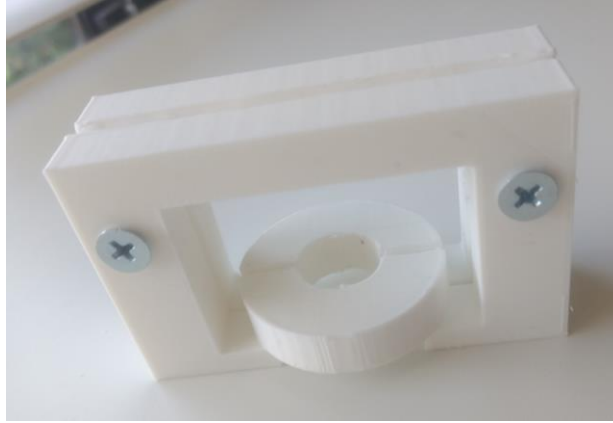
First Design for Robot Assembly/Disassembly Assistive Tool
